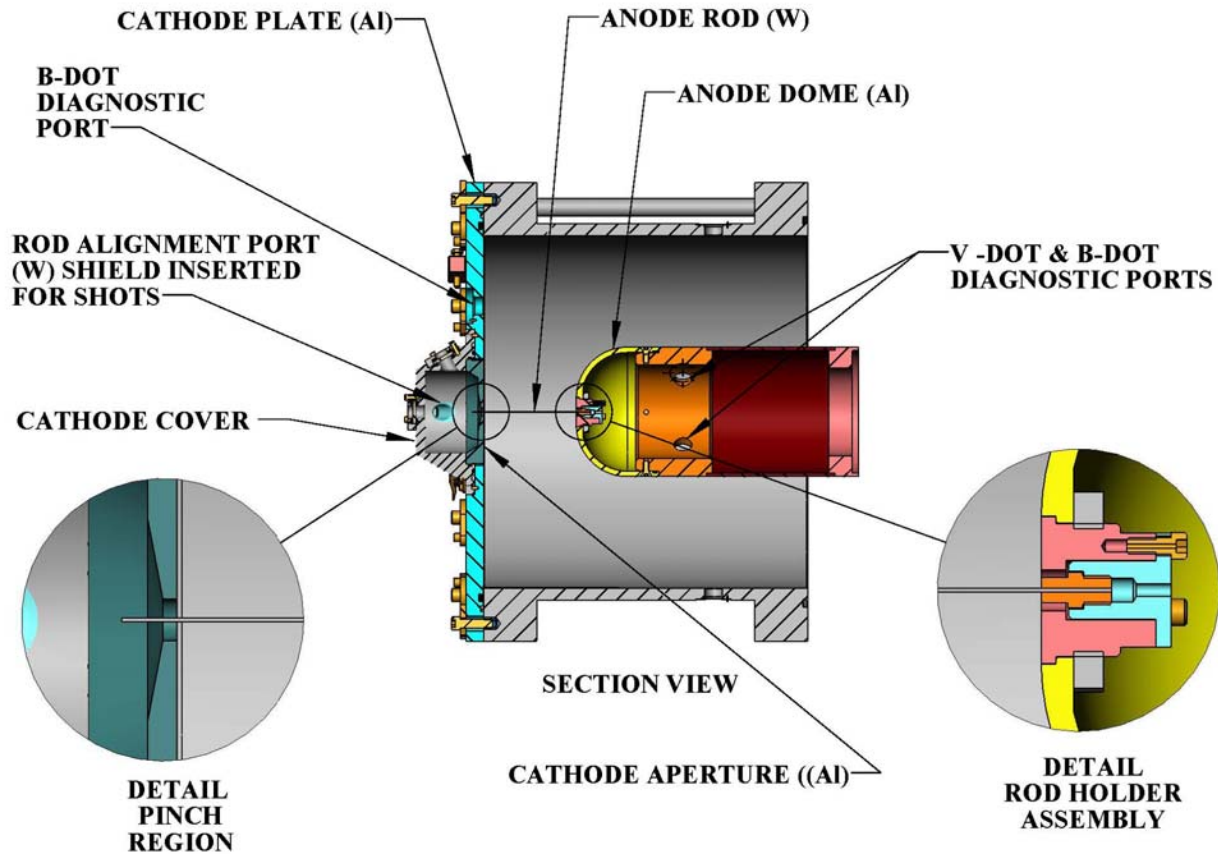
Cygnus rod pinch diode assembly. Detailed pinch region showing 3mm thick Al aperture and W rod with a 10mm extension. Detailed rod holder region showing the standard 3 piece stainless steel holder assembly (gray-nut, pink-cylinder and turquoise-insert). The orange graphite piece has a tungsten anode rod friction fit into it and this rod graphite sub assembly is threaded and screwed into the 3 piece stainless steel holder.
